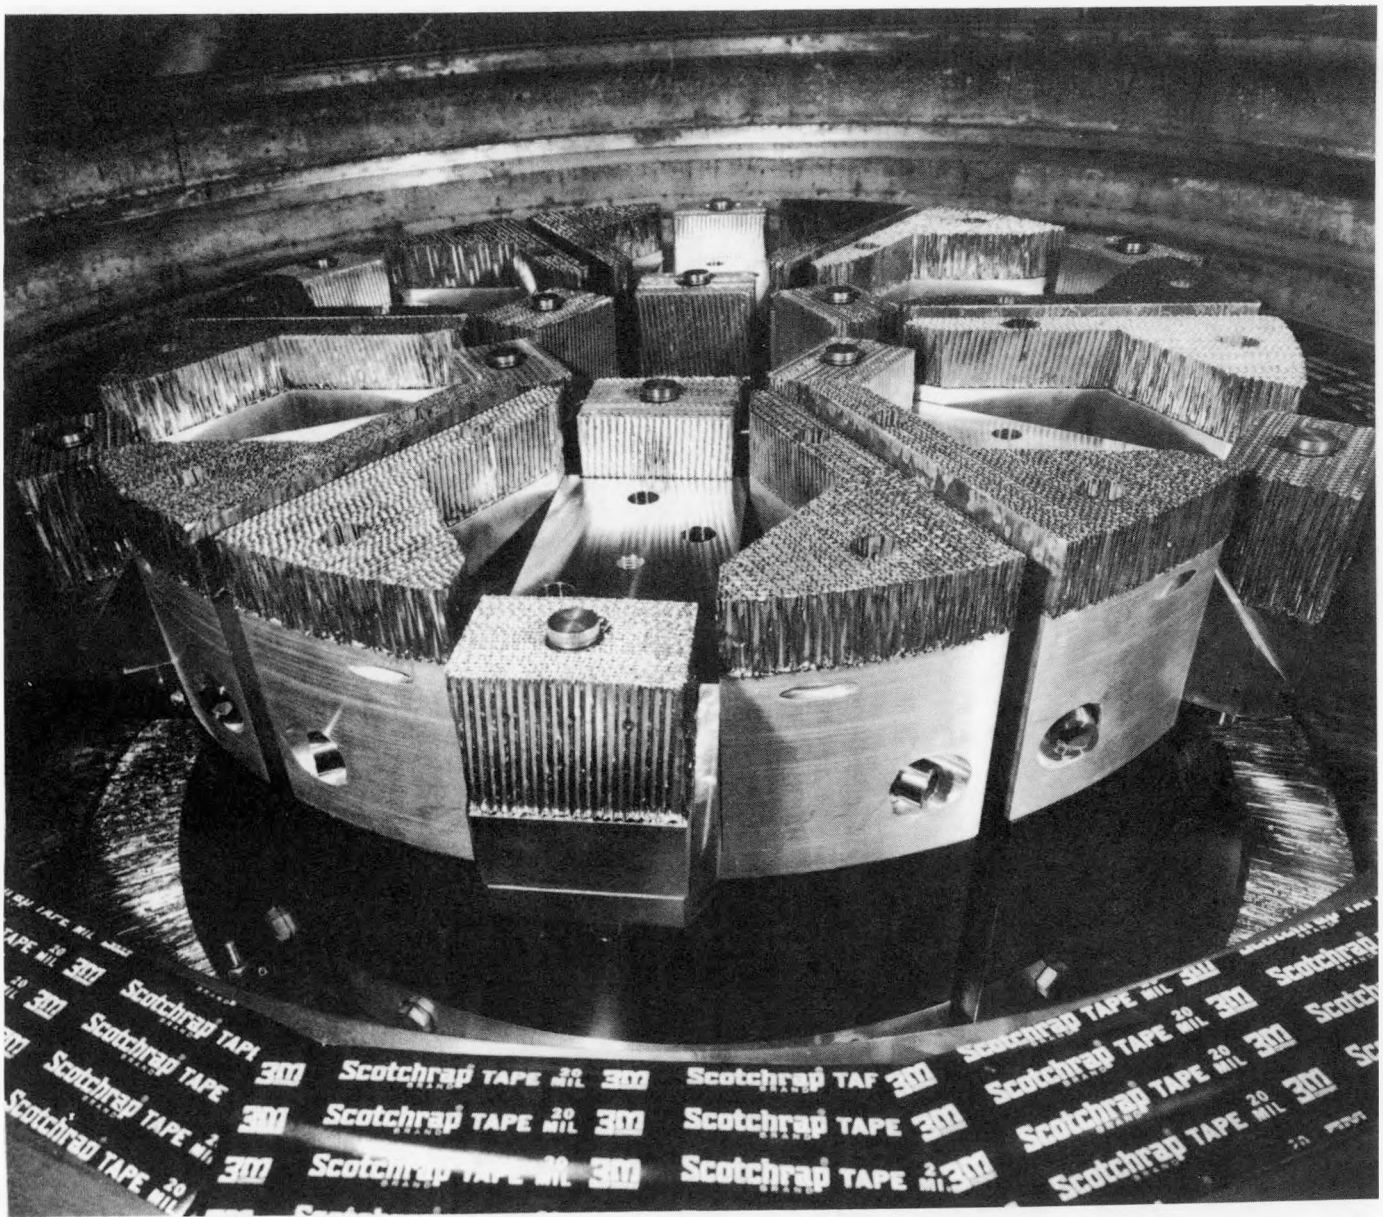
Seed Fuel Module Holders Installed in M-130 Containers
